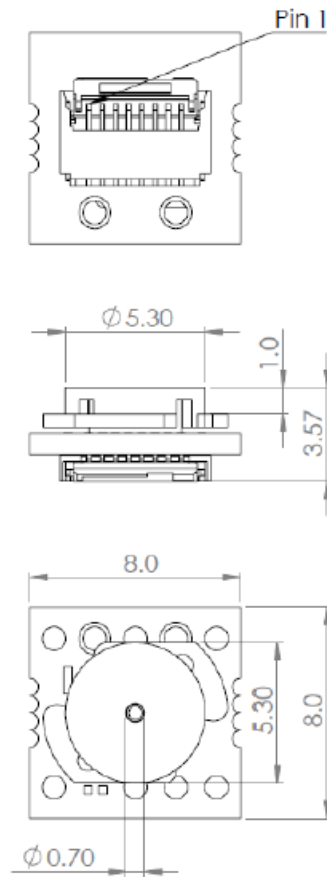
Dimensions of the EV_MOD_CH101 assembly
